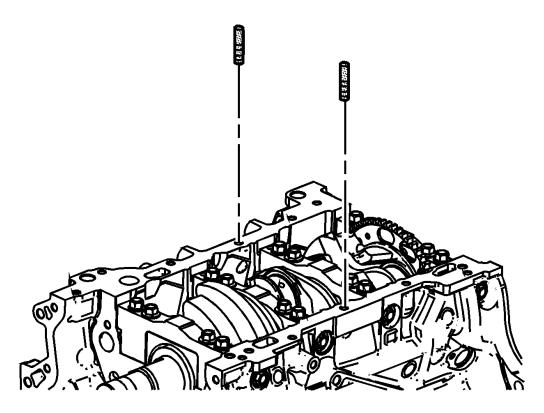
View Of Oil Pan & Block Courtesy of GENERAL MOTORS COMPANY
